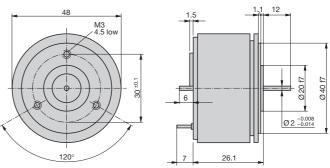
KINAX 2W2 with special shaft drive at front and at rear. At front: Ø 2 mm, length 12 mm. At rear: Ø 2 mm, length 6 mm.
